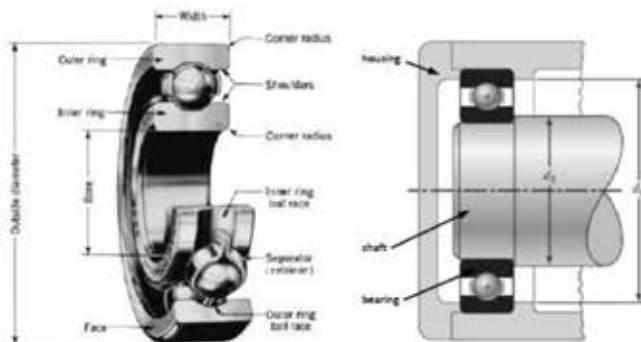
Single-row deep-groove ball bearing and schematic of bearing shaft assembly (Shigley, C. Mischke, Mechanical Engineering Design, McGraw Hill, 7th ed. 2003)
